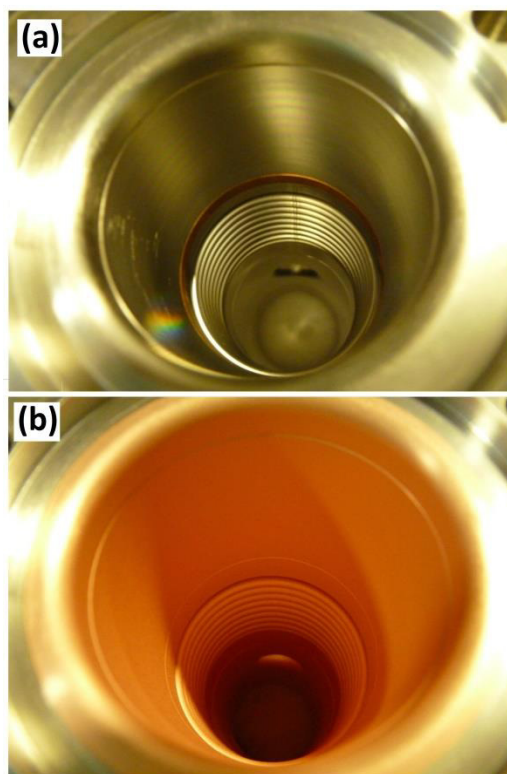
TTF CEC coupler part, (a) Before and (b) After copper coating.
